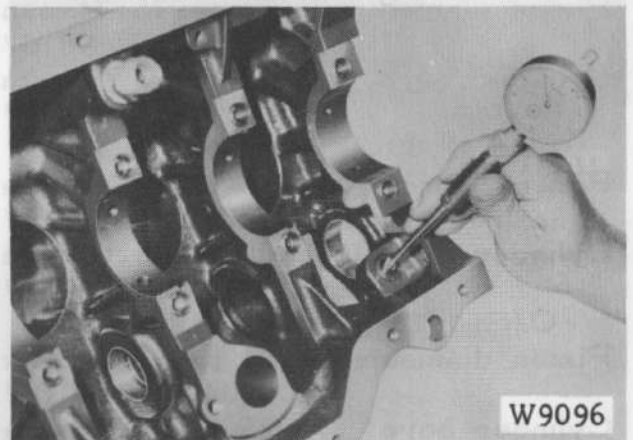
Measuring Distributor Shaft Bushing Bore
